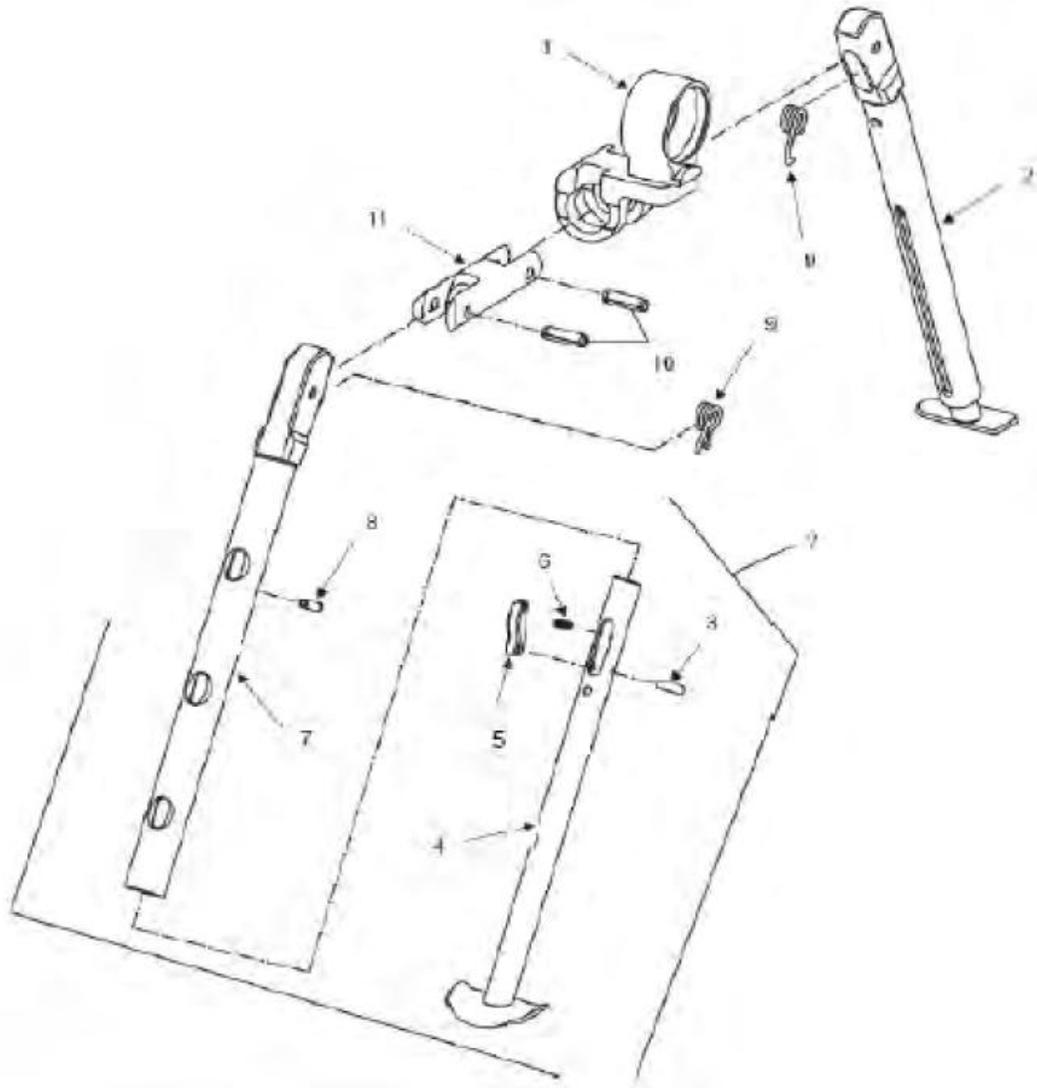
Bipod Assembly, Machine Gun 13022945
